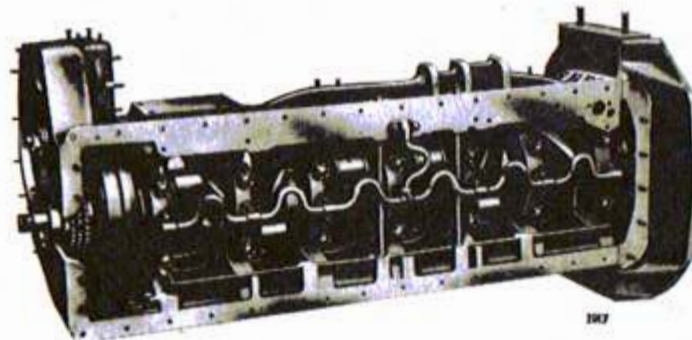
MAIN BEARING OIL DISTRIBUTION PIPE—COPPER
